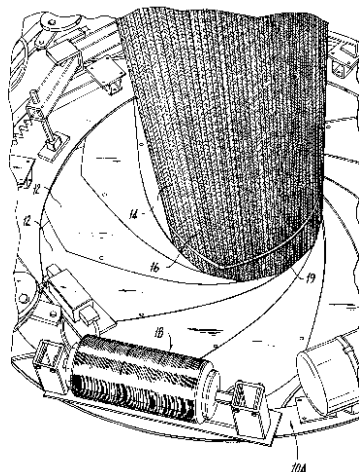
Adjustable inside diameter guide ring from A&P Technology Inc Patent. [18]
